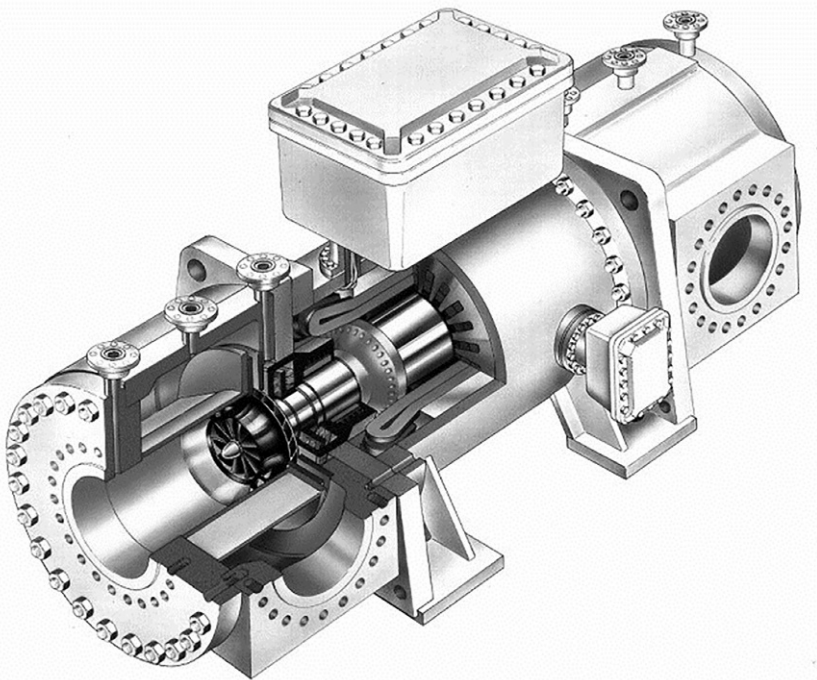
This “MOPICO” centrifugal compressor, designed for pipeline compressor stations, is characterized by its axial and radial magnetic bearings, gas face seals, and high frequency motor, which powers the compressor without a gear box. (Courtesy of MAN Turbomaschinen AG Schweiz.)
